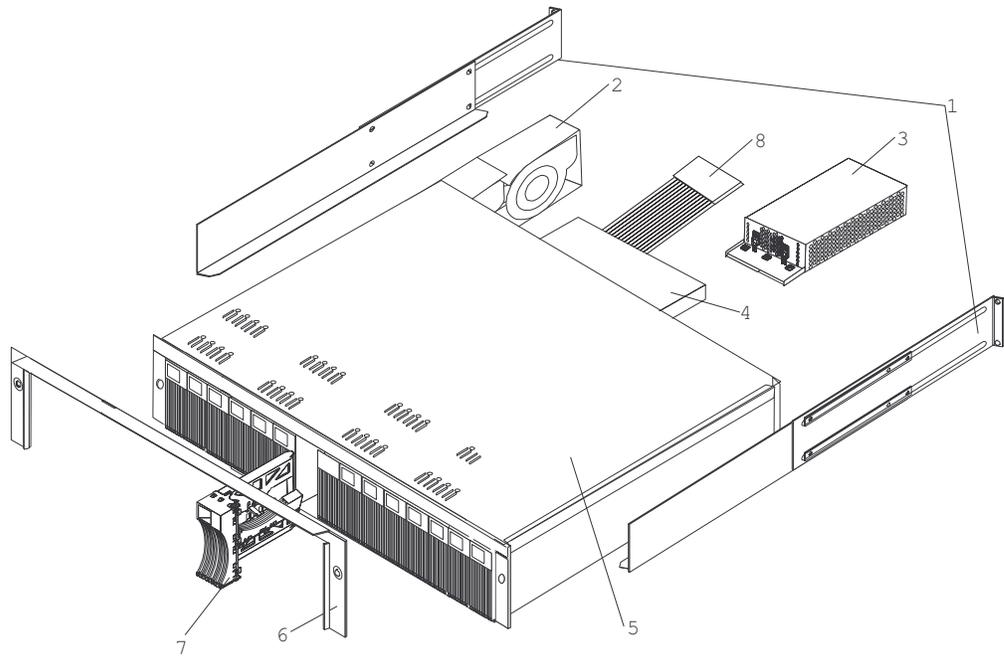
TotalStorage FAStT EXP700 and FAStT EXP710 storage expansion unit parts list
